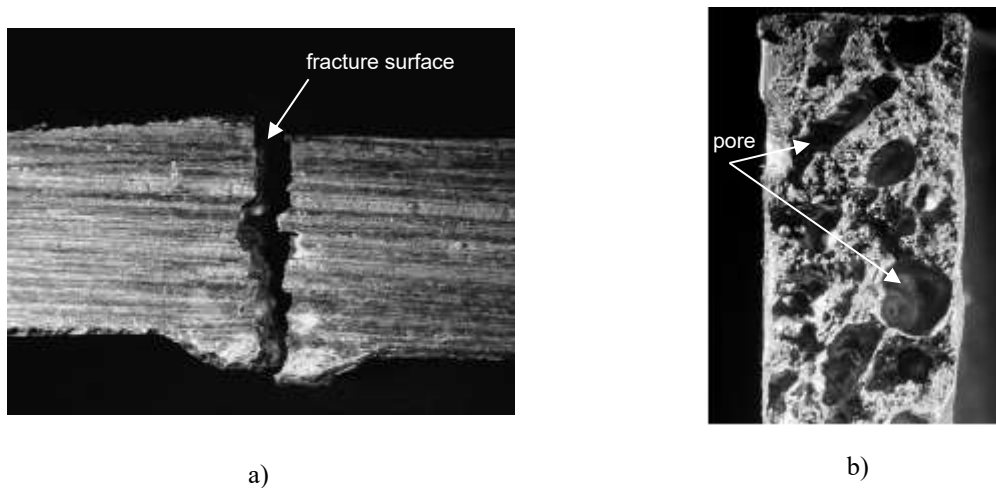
a) Location of the fracture surface in the weld bead; b) Fracture surface A series [23].
